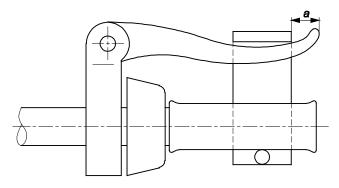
Method of fitting the gauge to the brake-lever and handlebar (Minimum grip length is shown)
